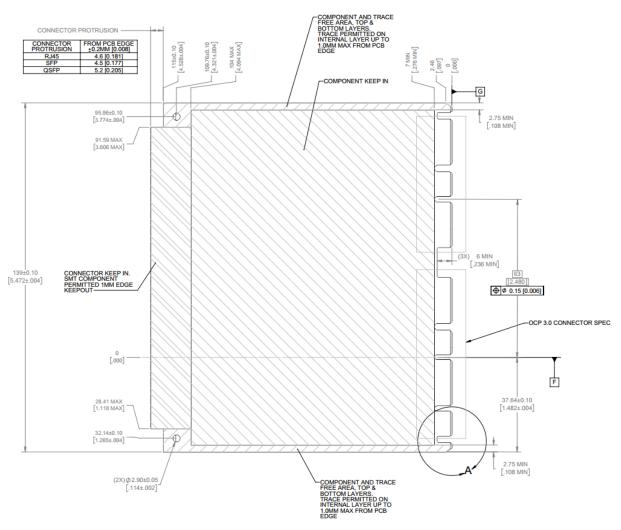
Large Form Factor Keep Out Zone – Bottom View
